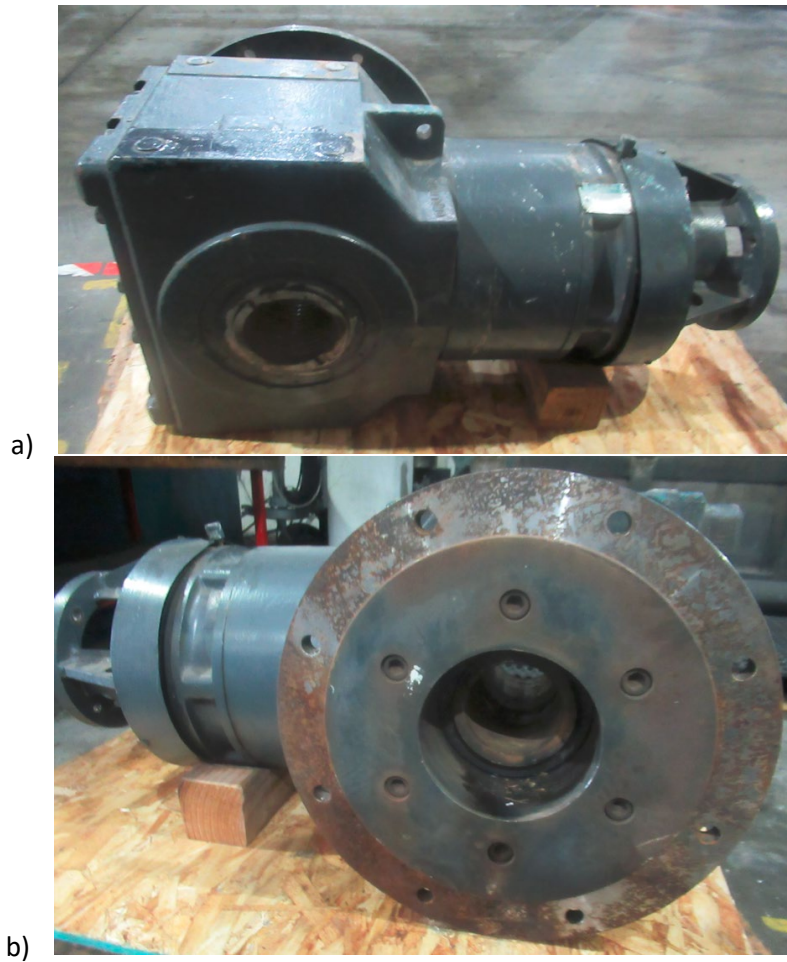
External condition of the gearbox. a) back of the unit, no defects; b) front of the unit, leakage on low speed shaft seal and mild rust on the flange's mounting surface.
